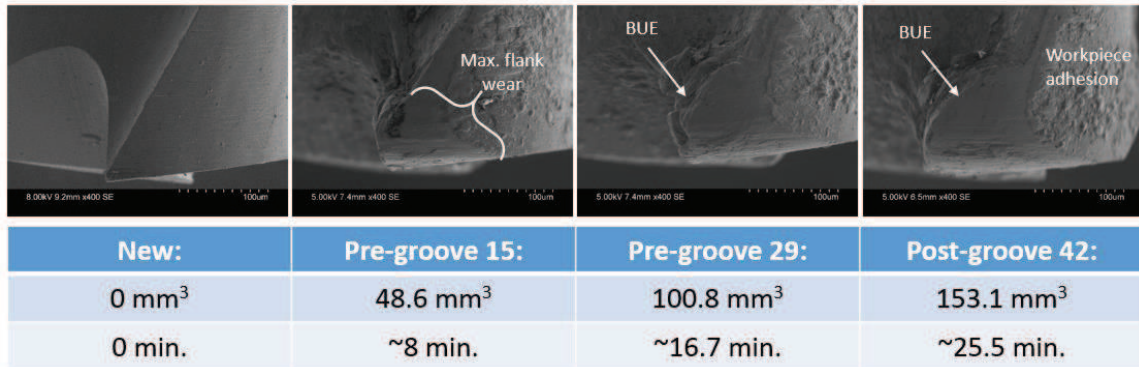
Representative peripheral cutting edge and flank of the tool over the test duration.
